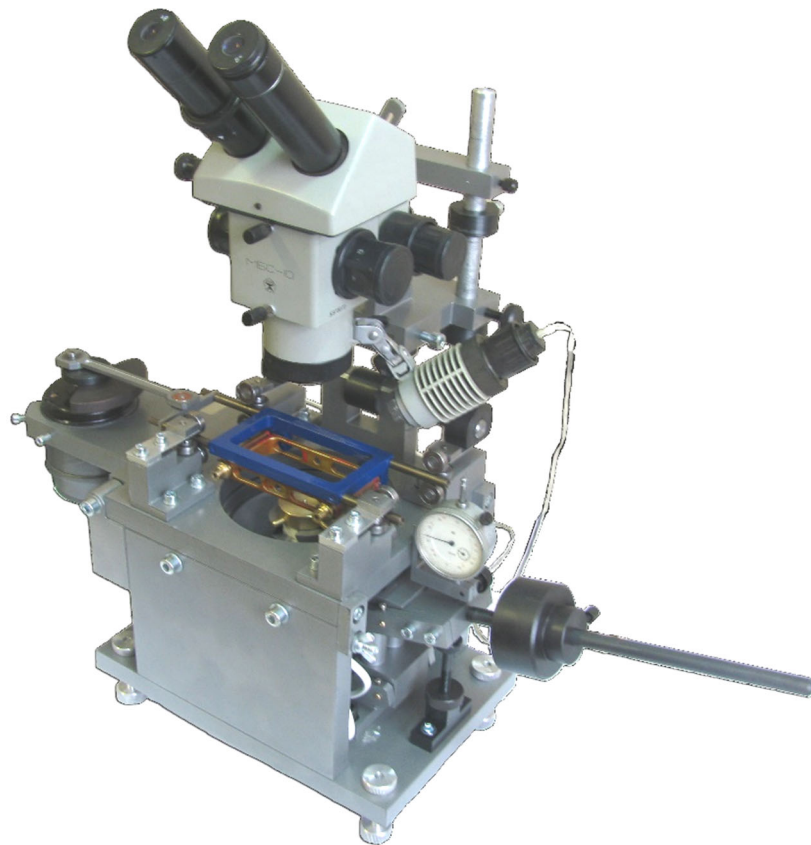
Appearance of the small-sized desktop machine "ALTEC-13009".
